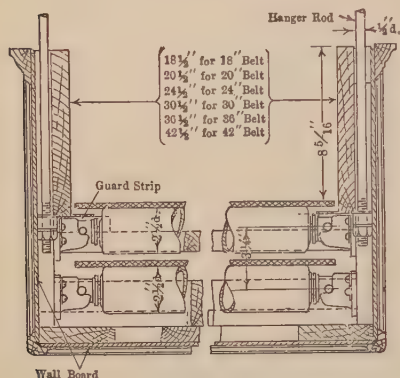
Package Conveyor, Panel Board Enclosure. Bronze Roll Bearings. (Lamson Co.)
